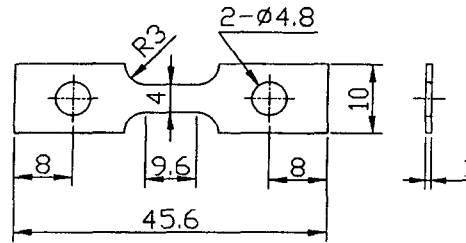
Dimensions of tensile creep specimen (unit ; mm)
